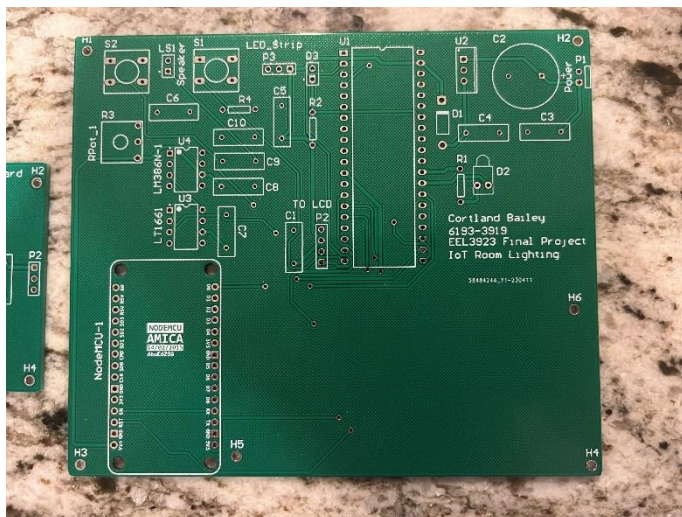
Primary board PCB layout (With polygon pours shelved)
